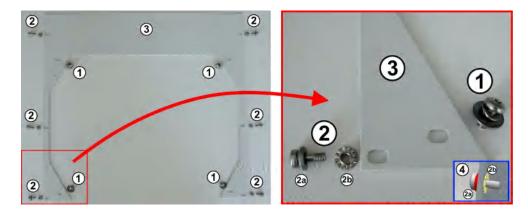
Matching the screws and washers to the various holes in the metal rack cover sheet
